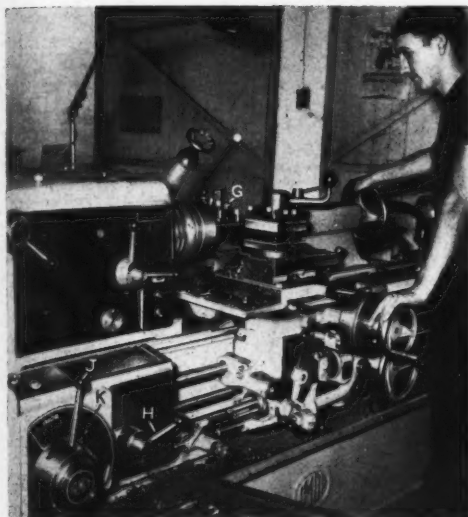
Set-up for copy-turning pinion shafts on a type MVD lathe fitted with a Duplomatic hydraulically-operated profiling attachment. The machine is equipped with the company's Dialmatic gearbox for the feed motions of the saddle and cross-slide
